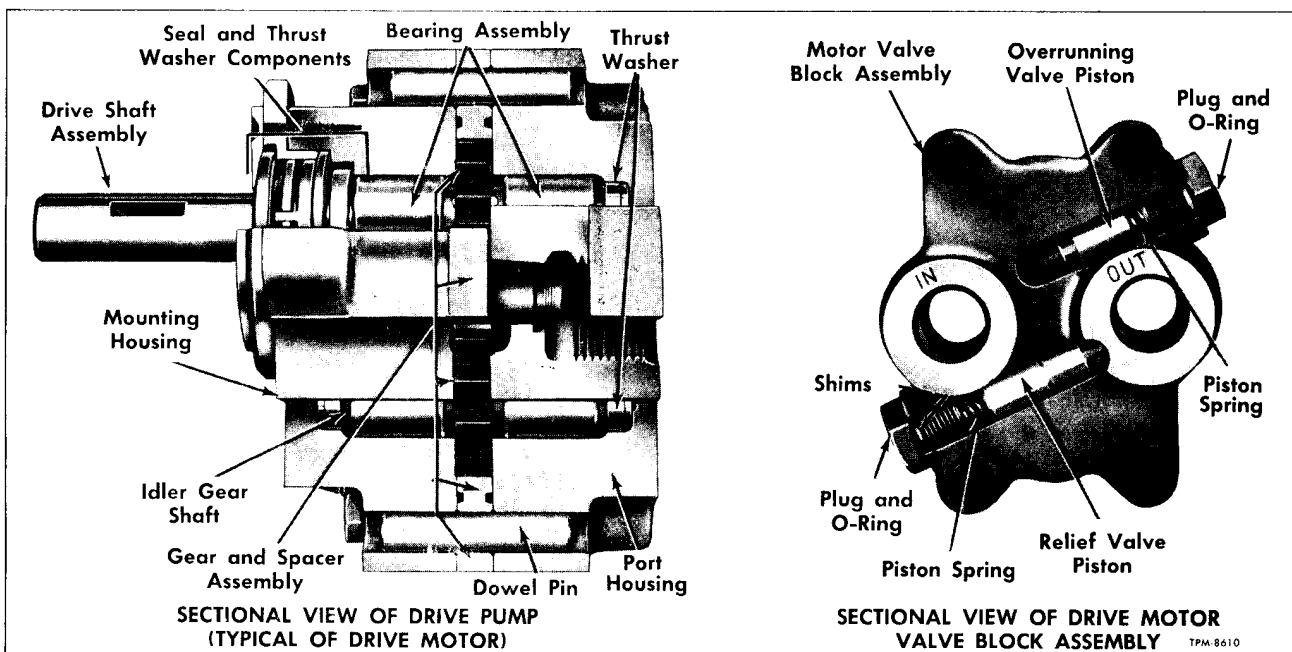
Cutaway View of Fan Drive Fluid Pump and Motor (Typical)
